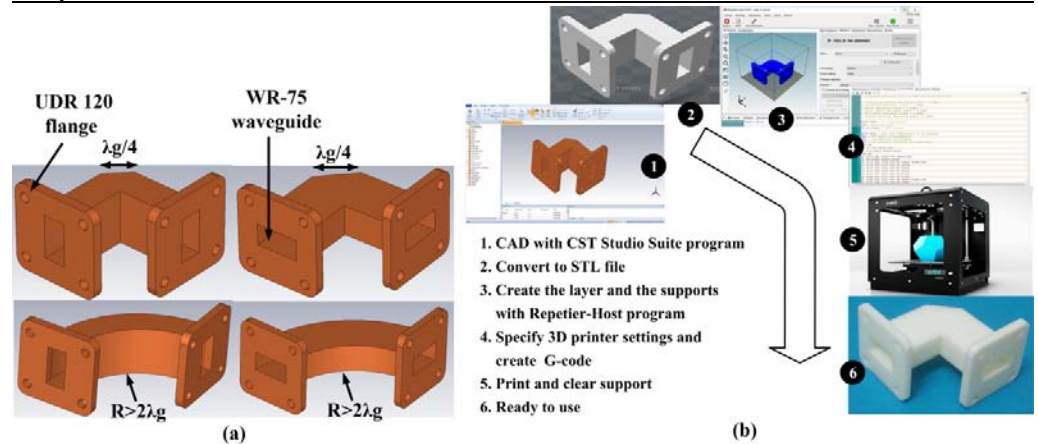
Figure A. a) E-type and H-type sharp bend and E-type and H-type bend components, respectively b) 3D printing steps
